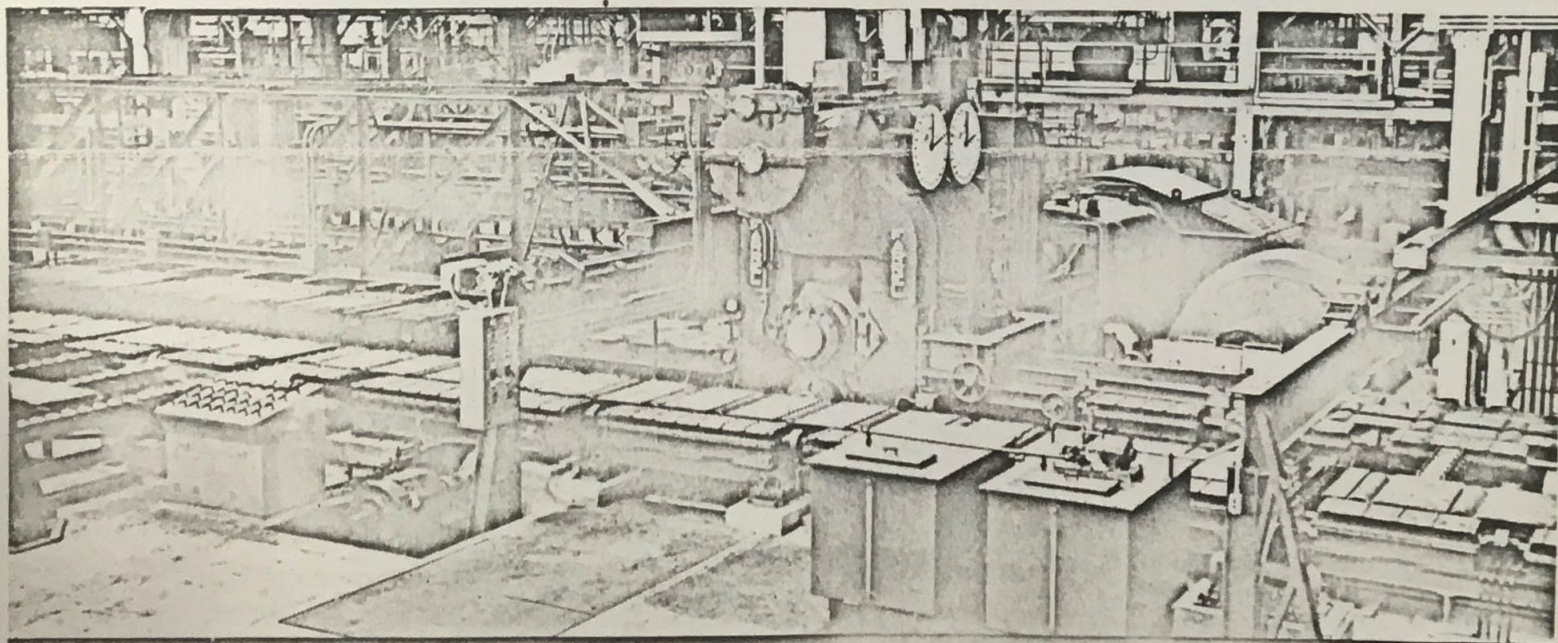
General view of mill opposite drive side. Roll-changing rig is recessed under floor plate in foreground.
